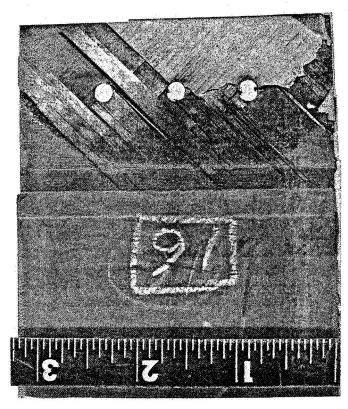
Failure of a Bonded Joint Specimen Tested Statically at -65° F.
